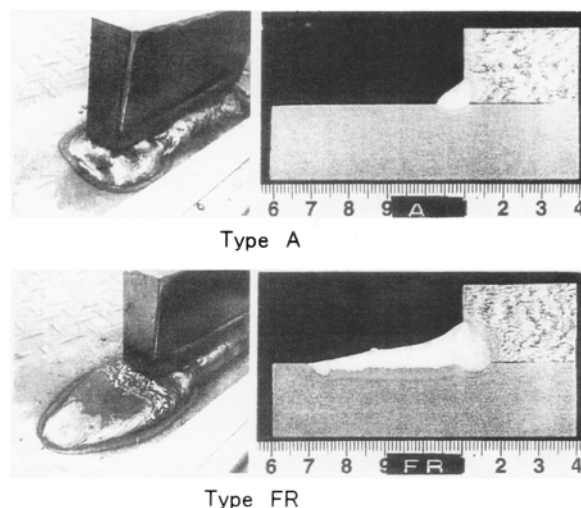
Appearance and macrostructure of boxing fillet weld part
